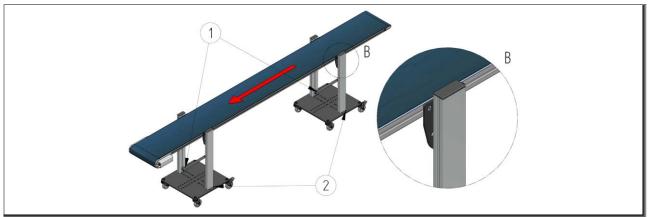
Overall construction assembly conveyor with support BE 020 – BM 120 (typical)
